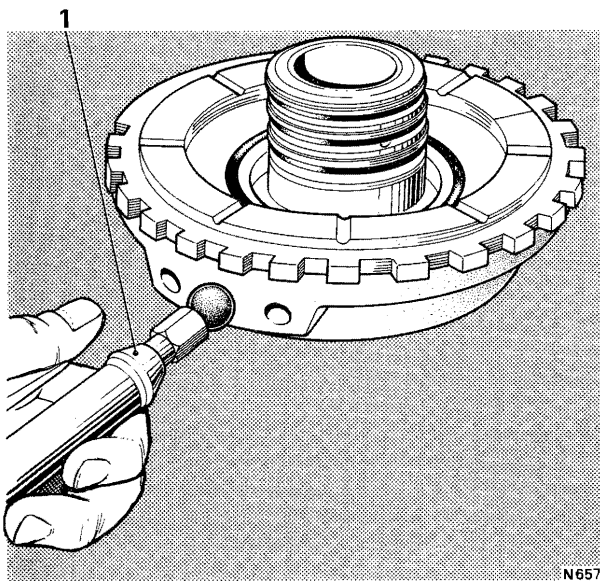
AIR TESTING THE INTERMEDIATE CLUTCH
